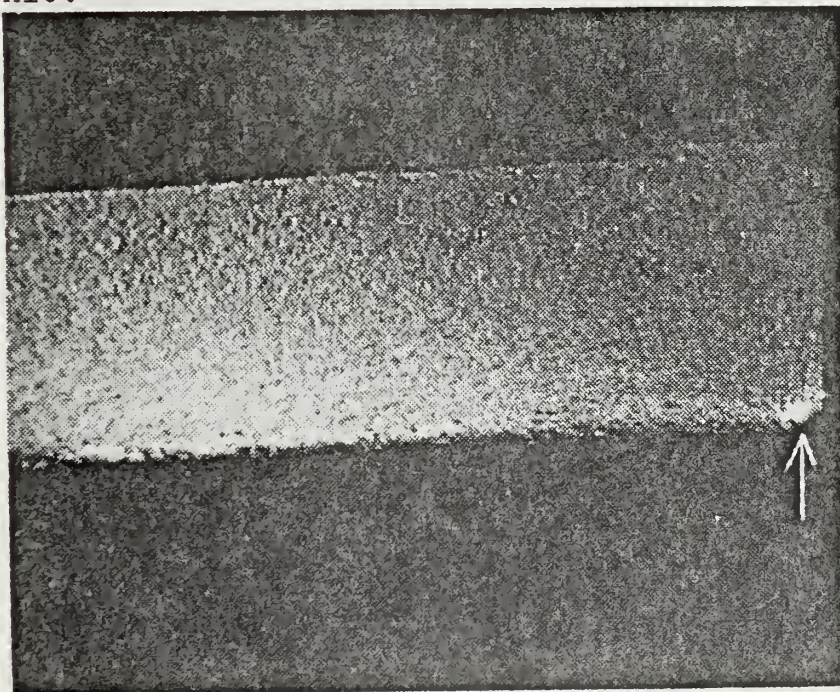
Macro-fractograph of a specimen AR-1-3 which was fractured after 185,700 cycles at 65 ksi, showing fatigue zone with one crack origin, occupying the entire fracture surface. Radial marks indicates crack initiation site. X10.
